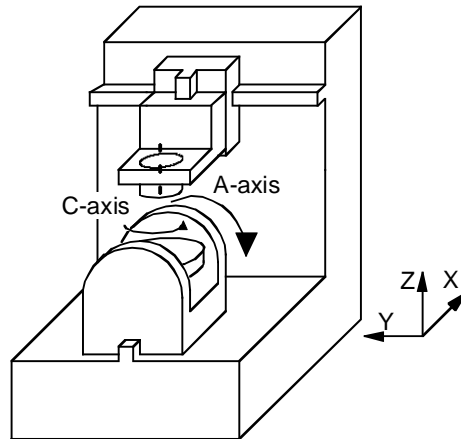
Kinematic (schematic) of the third machine tool under investigation
